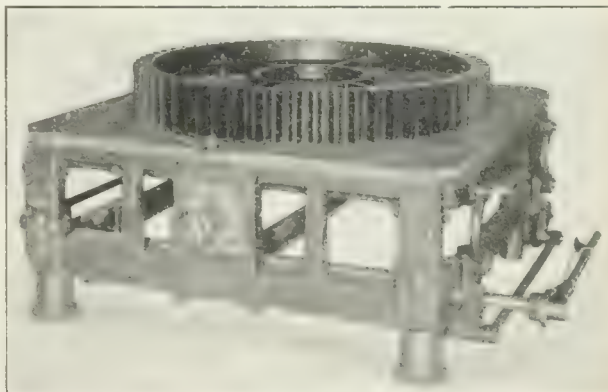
A Square Pridmore Heavy Double Shaft Stripping Plate Machine with a 52-In. Gear Pattern.
